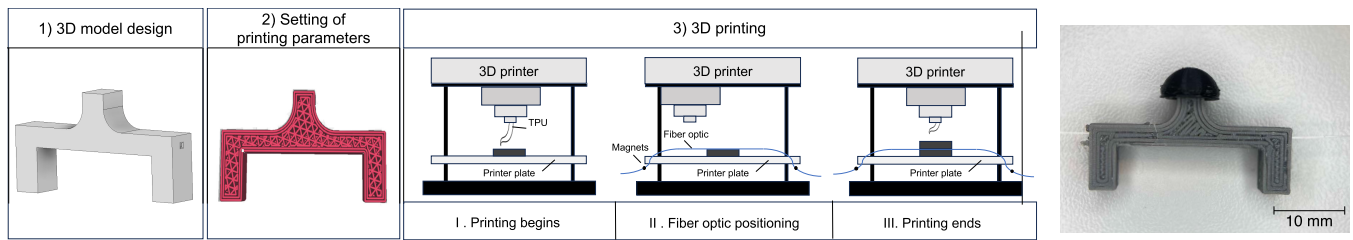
Main fabrication steps of the U-shaped structure: from the 3-D model design to the 3-D printing, including the FBG integration and the final prototype with a reference scale.
